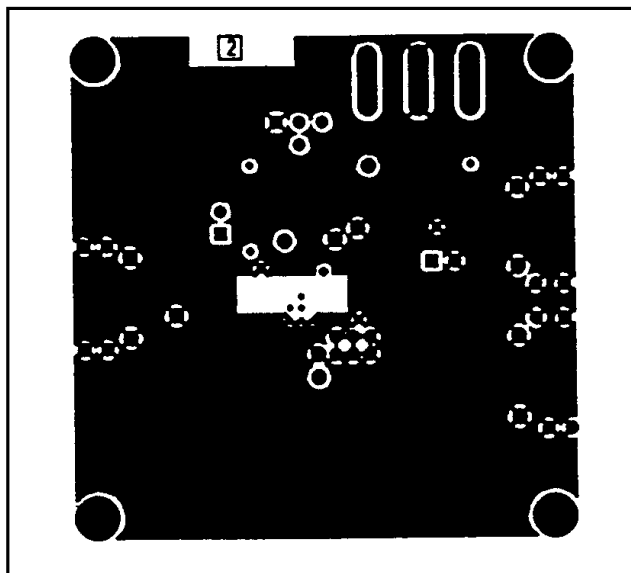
MAX3760 EV Kit PC Board Layout—Ground Plane
